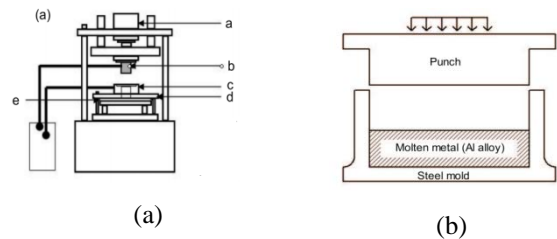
(a) Hydraulic System Pressures (b) Mold squeeze system [8]
